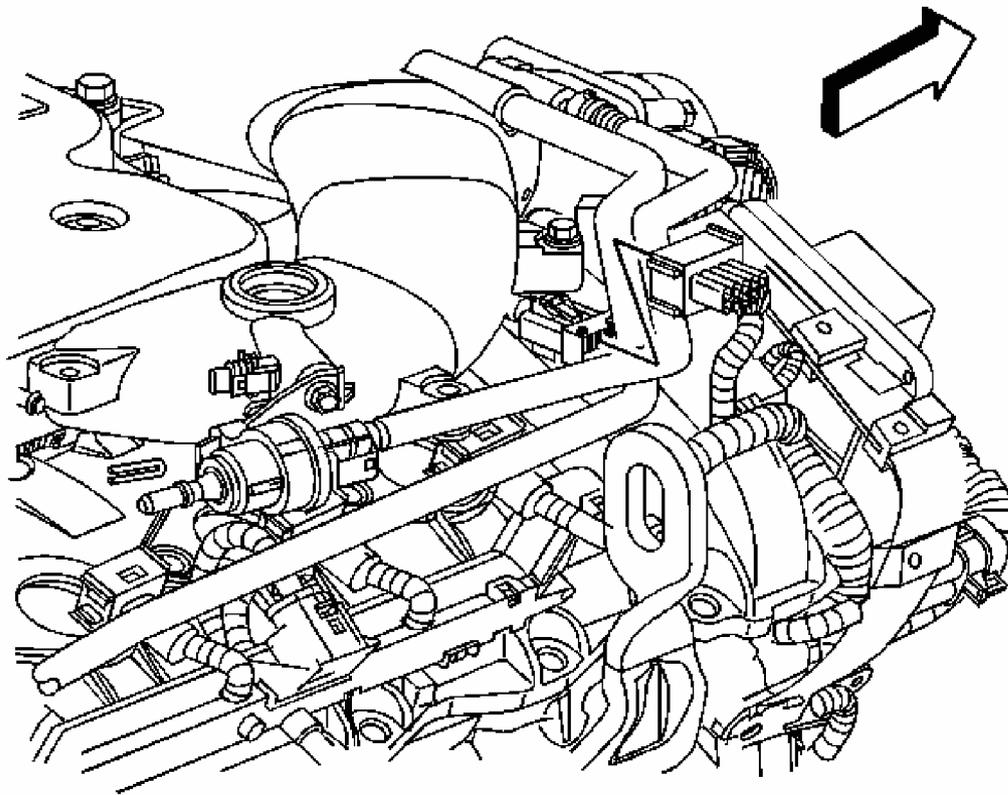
View Of Fuel Injector Harness Electrical Connector
